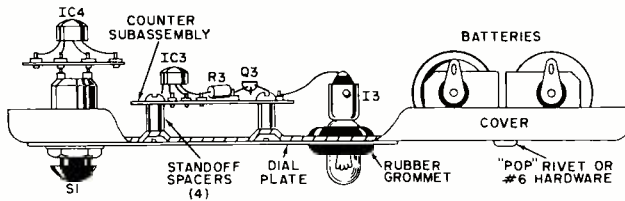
This cutaway view of the front cover shows how the subassembly is mounted on the spacers. Observe that the mounting screw holes are recessed a bit so the dialplate can lay flat on the cover assembly.
